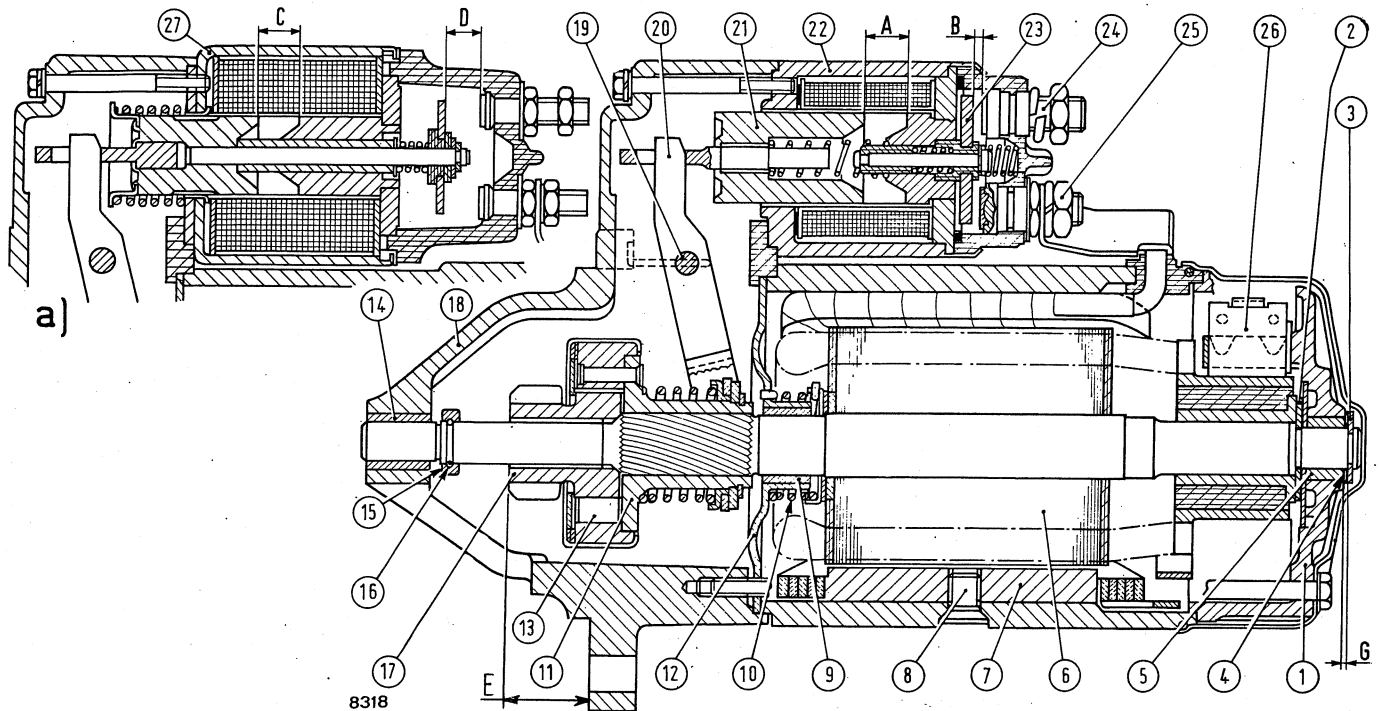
Cross section of Marelli starter motor mod. MT 68AA.
